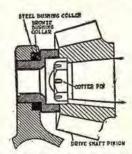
The cotter pin in the drive-shaft pinion lock nut should not interfere with the thrust bushing, and the bushing collars should be inserted in the manner shown.
